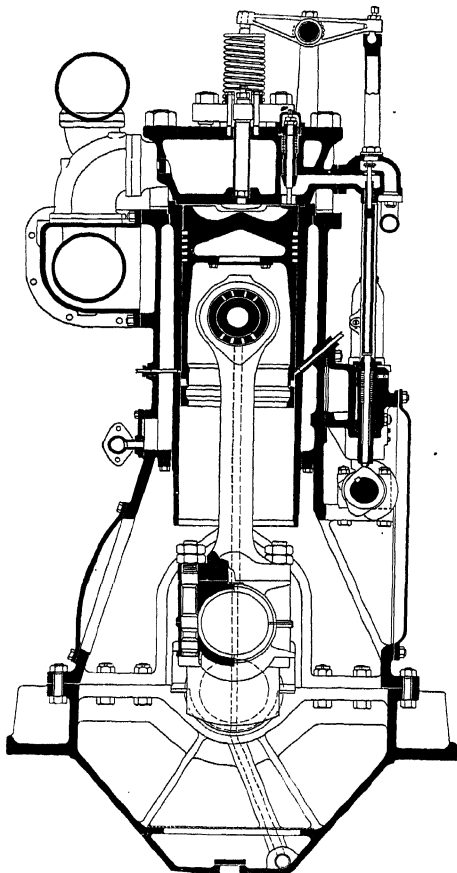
Four-stroke cycle, single-acting, solid-injection Diesel engine.
